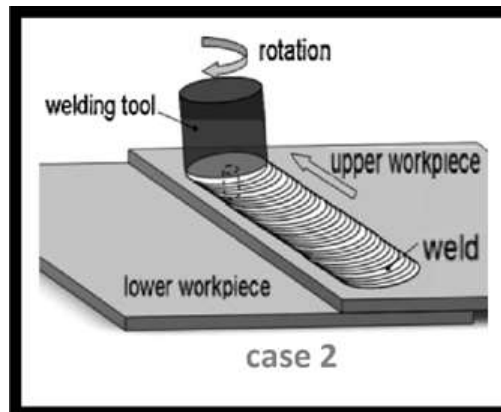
shows the friction stir lap welding (FSW) [2].
